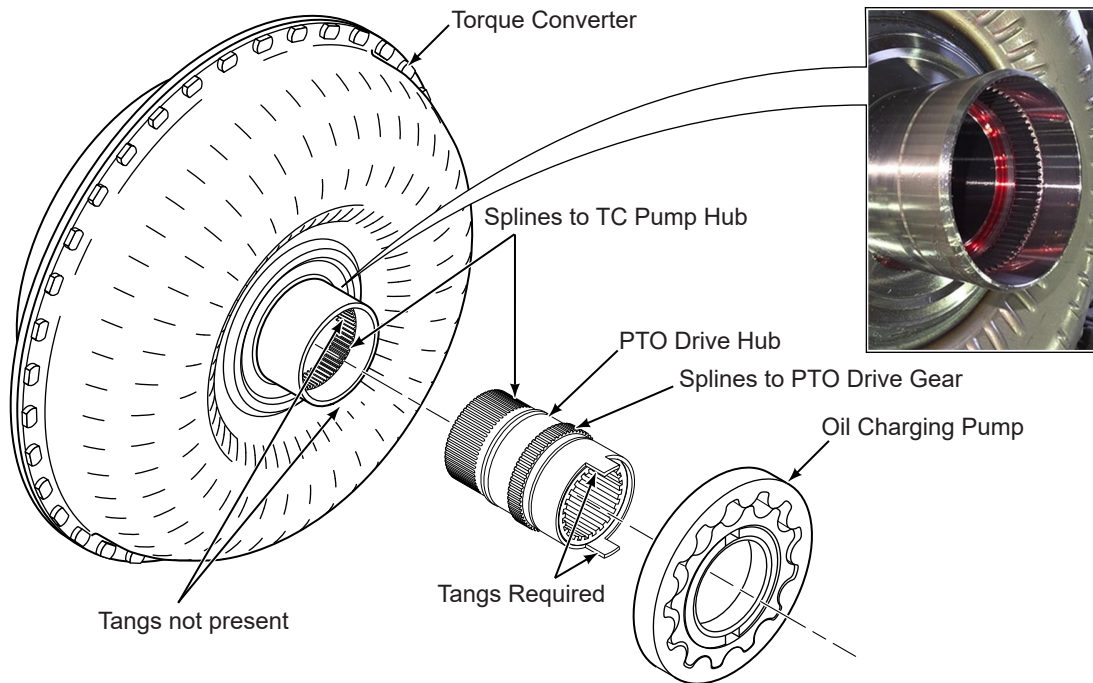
Typical Oil Pump Assembly without PTO Drive Gear
